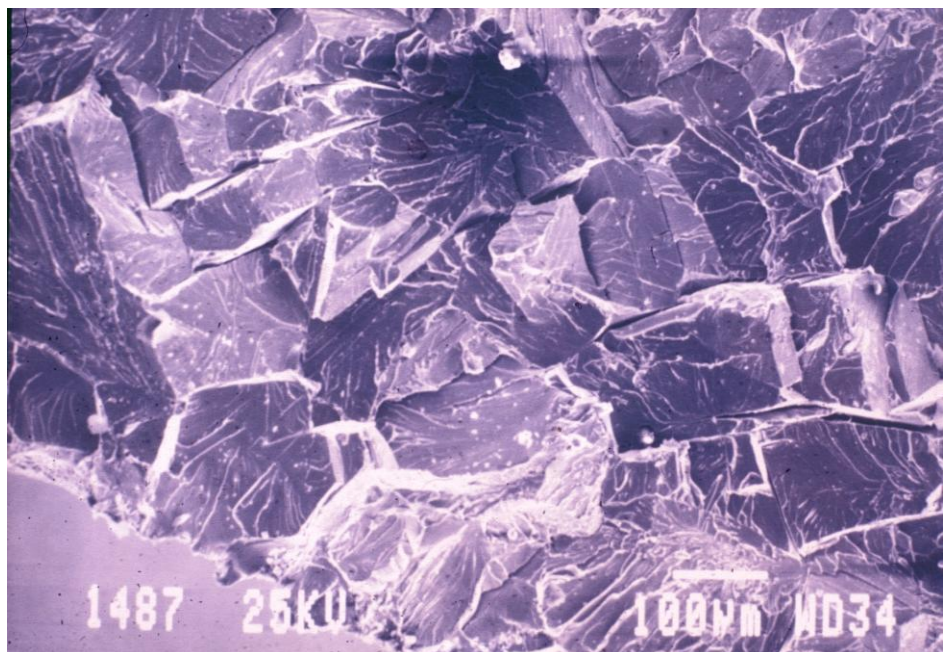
is a part of the drive shaft (shown in the right of the figure), a broken fragment of which impacted the wall of the magnesium casting oil sump ( shown in the left of the figure) within which the drive shaft is located. The impacting broken fragment tore a hole through the casting( shown with an arrow) and led to a total loss of the oil within the sump. Fig 32 is an example of a typical brittle fracture , also known as a cleavage fracture.
